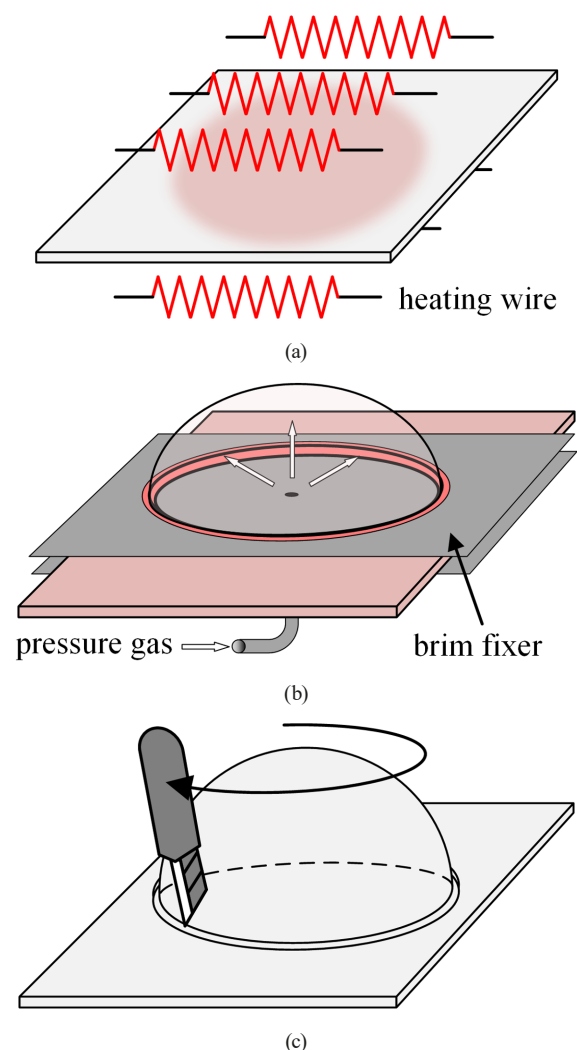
Thermomoulding of PMMA dome specimens (a) heating the PMMA plate; (b) moulding PMMA by pressure gas; (c) cutting
